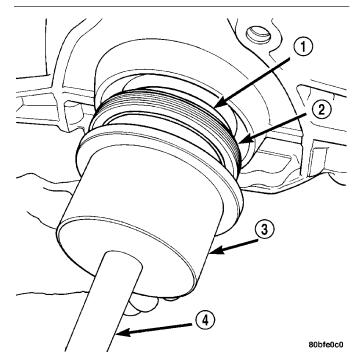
Crankshaft Seal and Special Tools 6926-2 & C-4171
